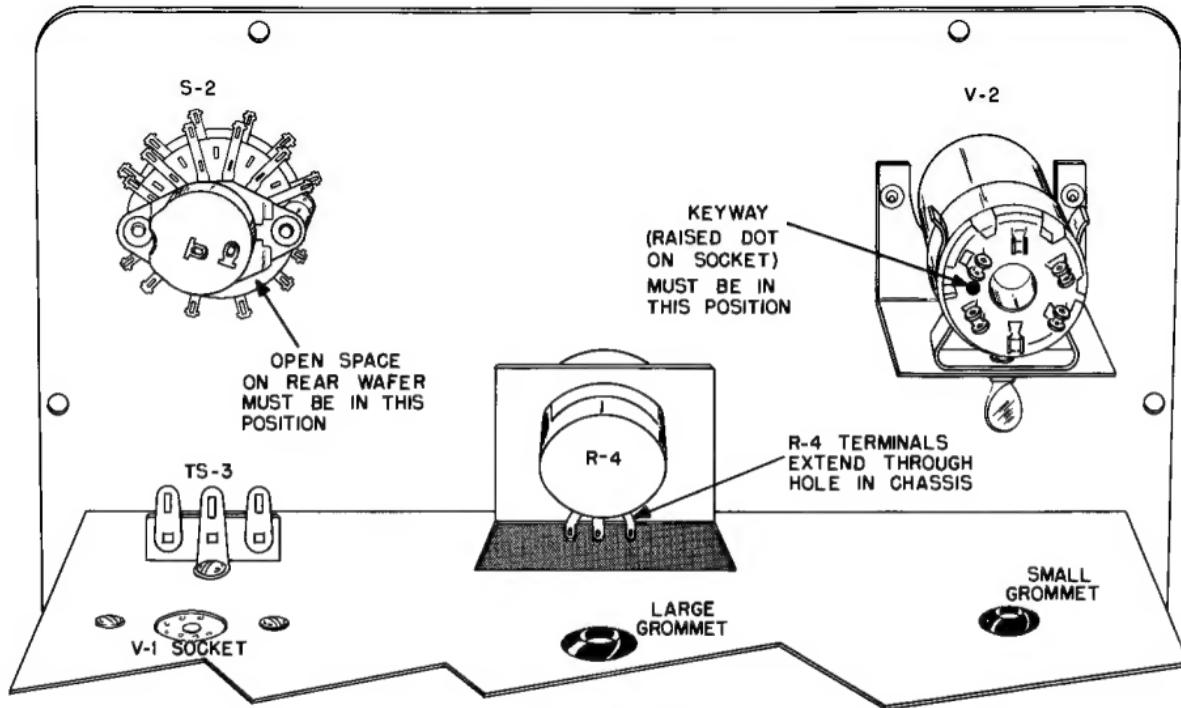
HOW TO MOUNT THE PARTS ON THE FRONT PANEL
